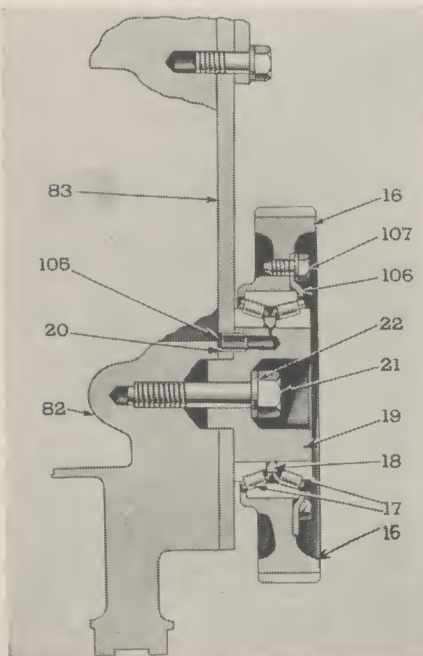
B—A GM engine idler gear installation. Bearing preload is controlled by thickness of spacer ring (18) and clamping action which is exerted on bearing cones by engine rear end plate and a boss on flywheel housing.
